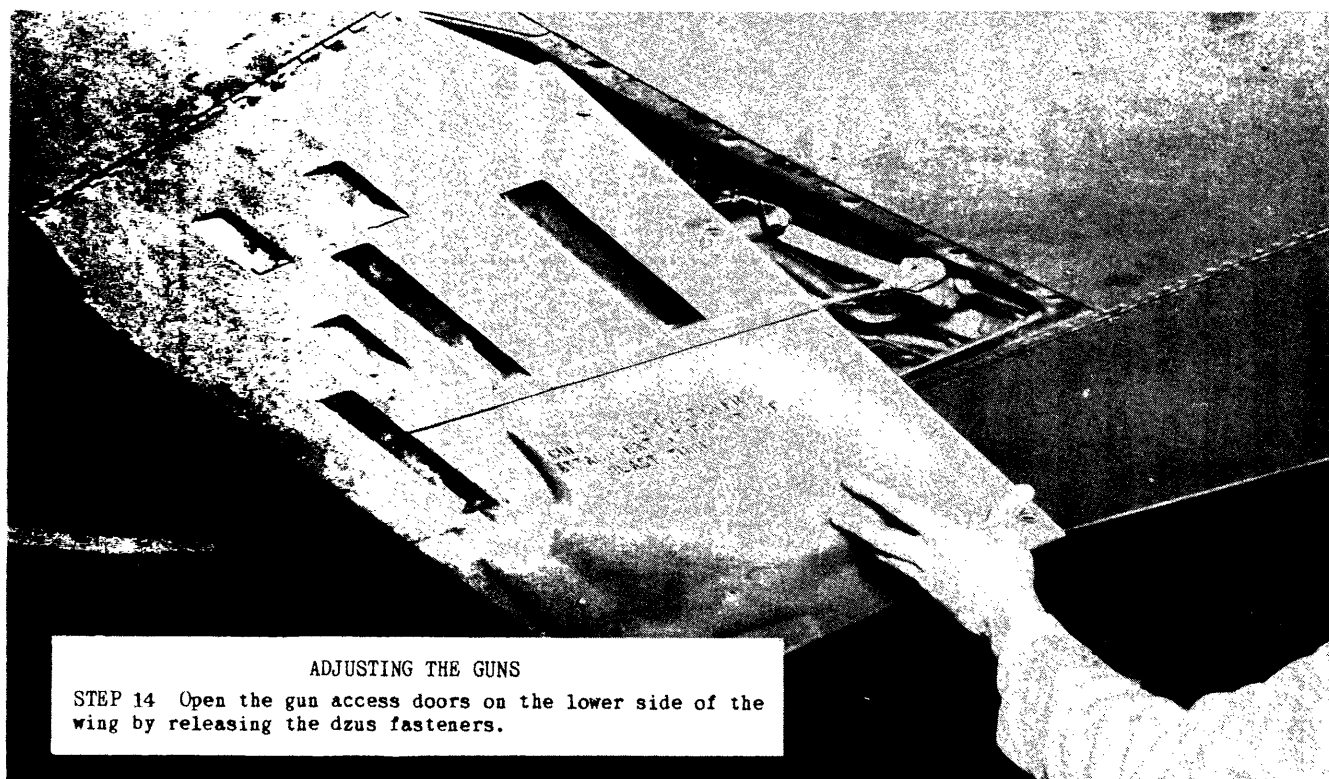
Bore-Sighting Guns - Target Method (Sheet 6 of 8 Sheets)
